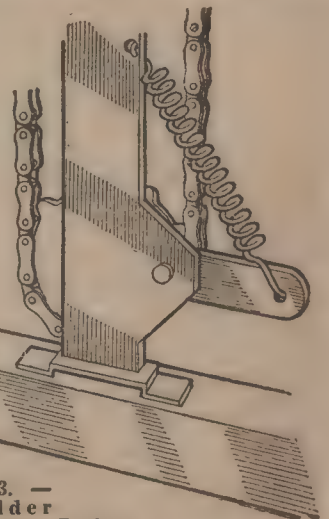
An older type of gear. Broken tension spring may cause winding chain to jump off sprockets.
